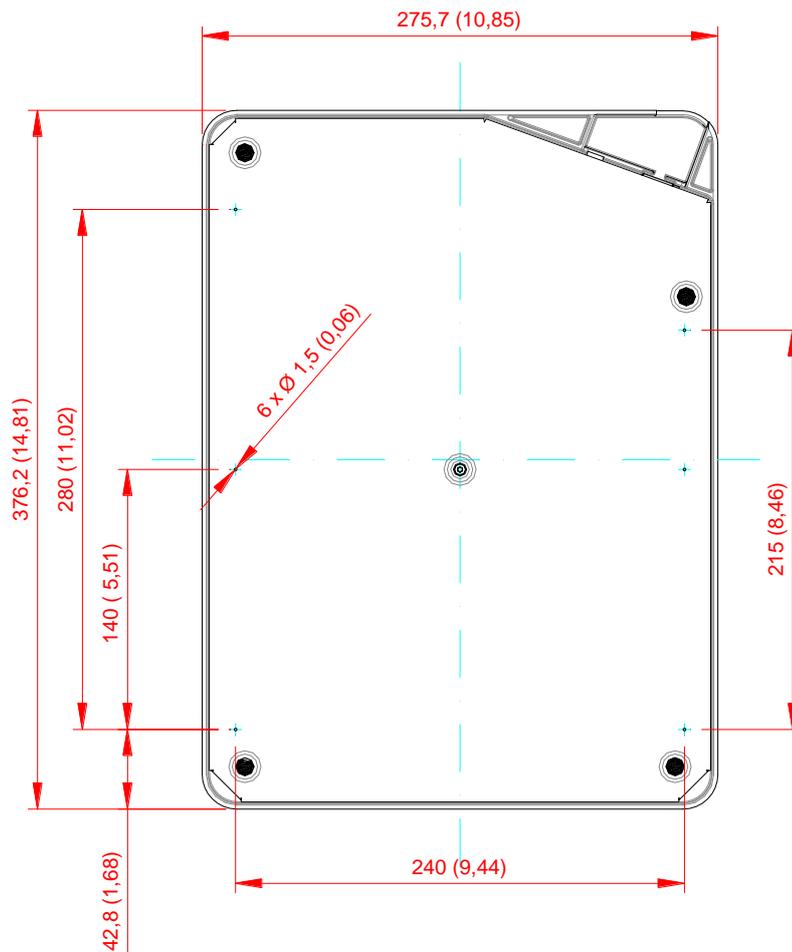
Dimensions of the antenna and positions of mounting holes (backside)
